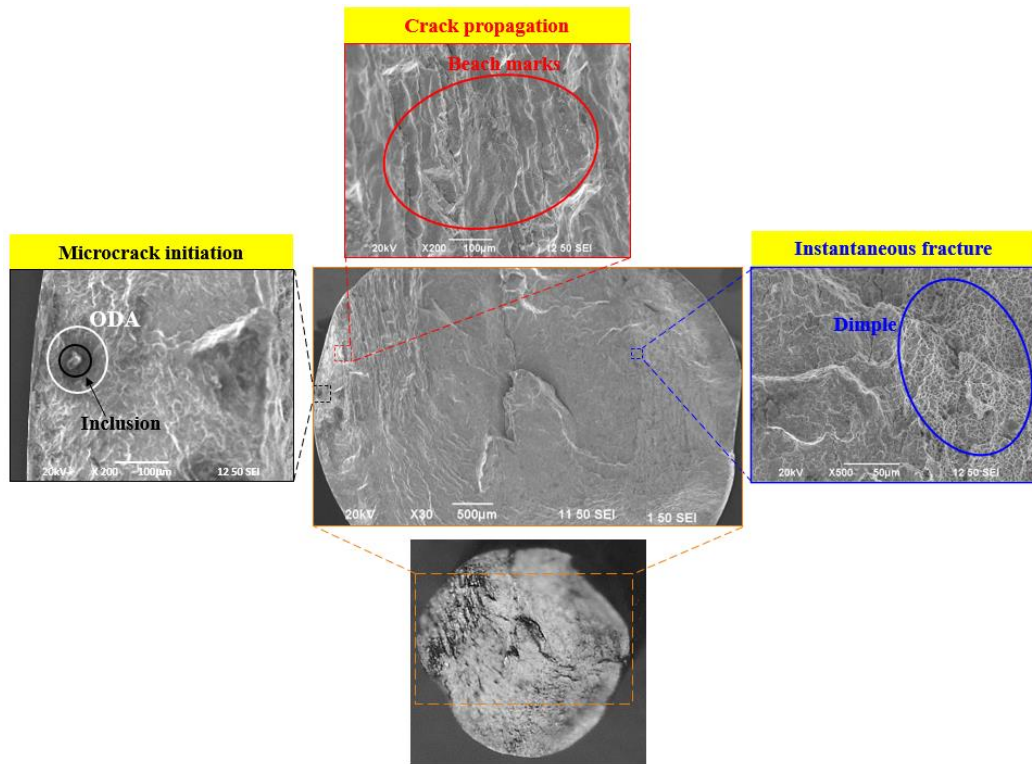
illustrates the observed SEM images of the fractured cross-sectional surfaces of Coupons QT-200-W1 and QT-150-W1. It is evident that some inclusions with typical dimensions at 20 to 30 μm are found within the weld metal on these fracture surfaces, and more importantly, optical dark areas (ODA) are identified near these inclusions, i.e. within a distance of approximately 80 to 120 μm . It should be noted that the formation of ODA may probably due to the plastic deformations and the micro-cracks under repeated cyclic actions.
